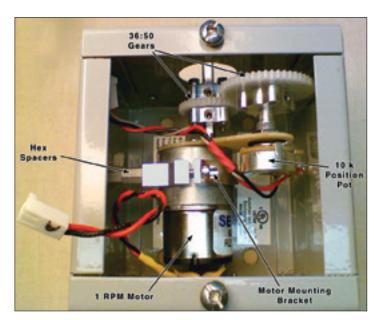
The az rotator assembly. [Graphic courtesy Mark Spencer, WA8SME]
